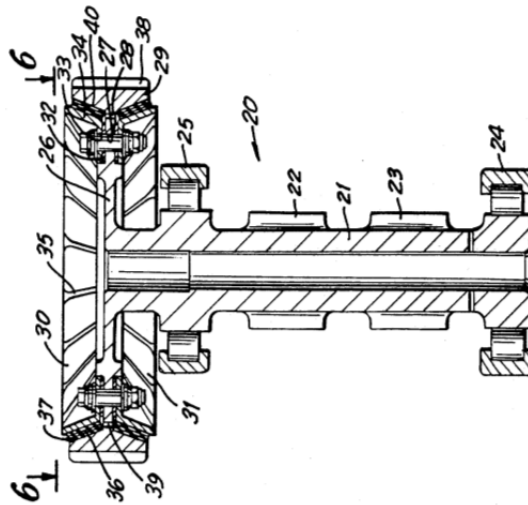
Gear assembly using an elastomeric torsional isolator (Kish & Webb, 1992)
